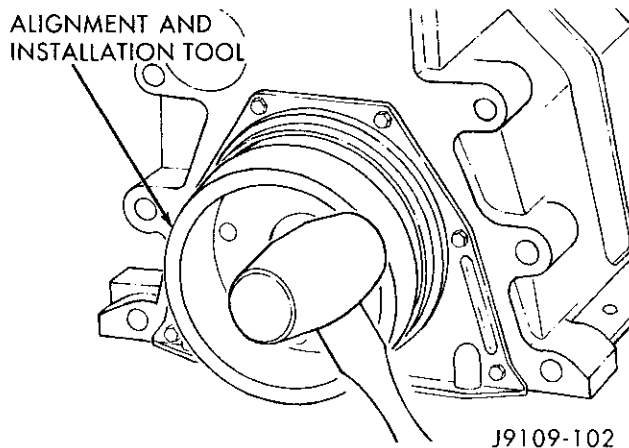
Crankshaft Rear Seal Alignment/Installation Tool
